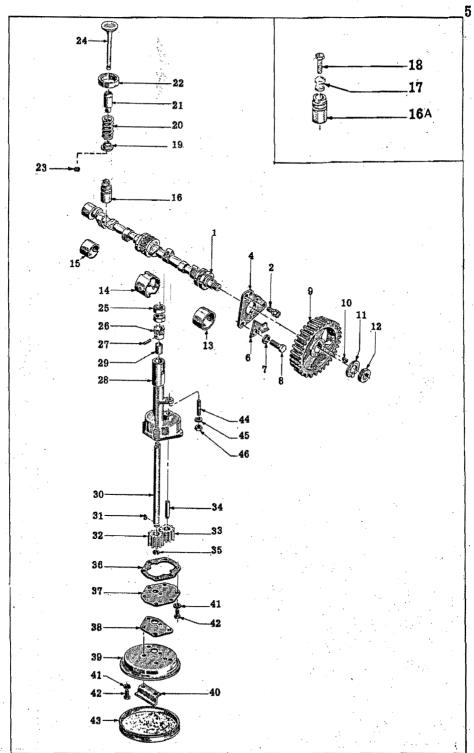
CAMSHAFT & OIL PUMP PARTS GROUP
